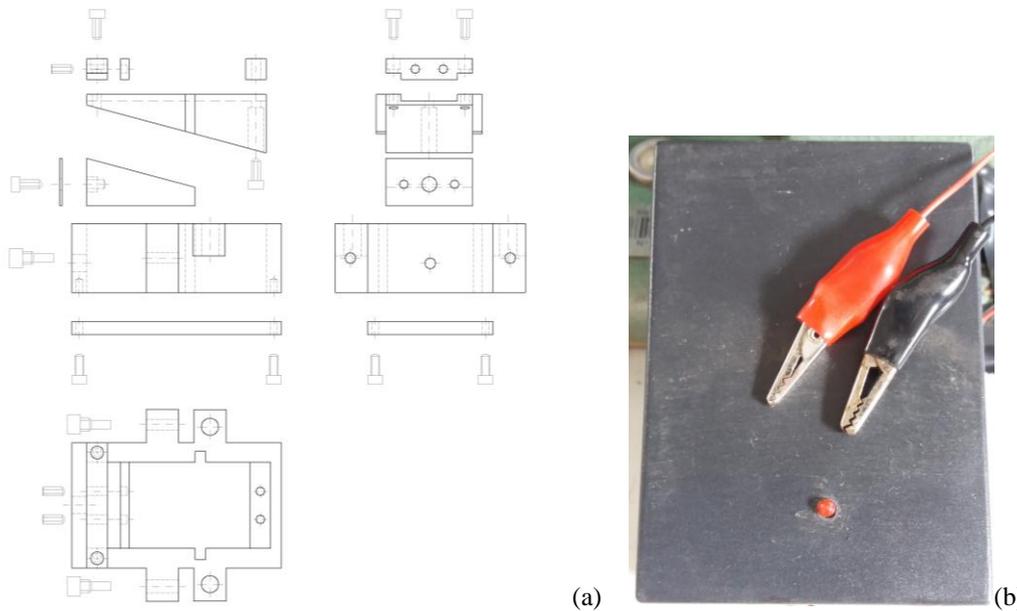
Control of scratch penetration depth: (a) scheme of the specimen holder; (b) open circuit rig.
